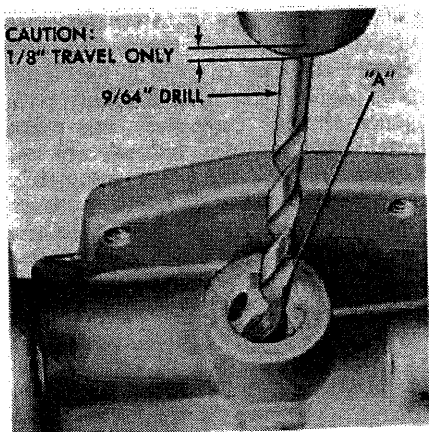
View showing method of removing early type check valve (25—Fig. E2-2).
